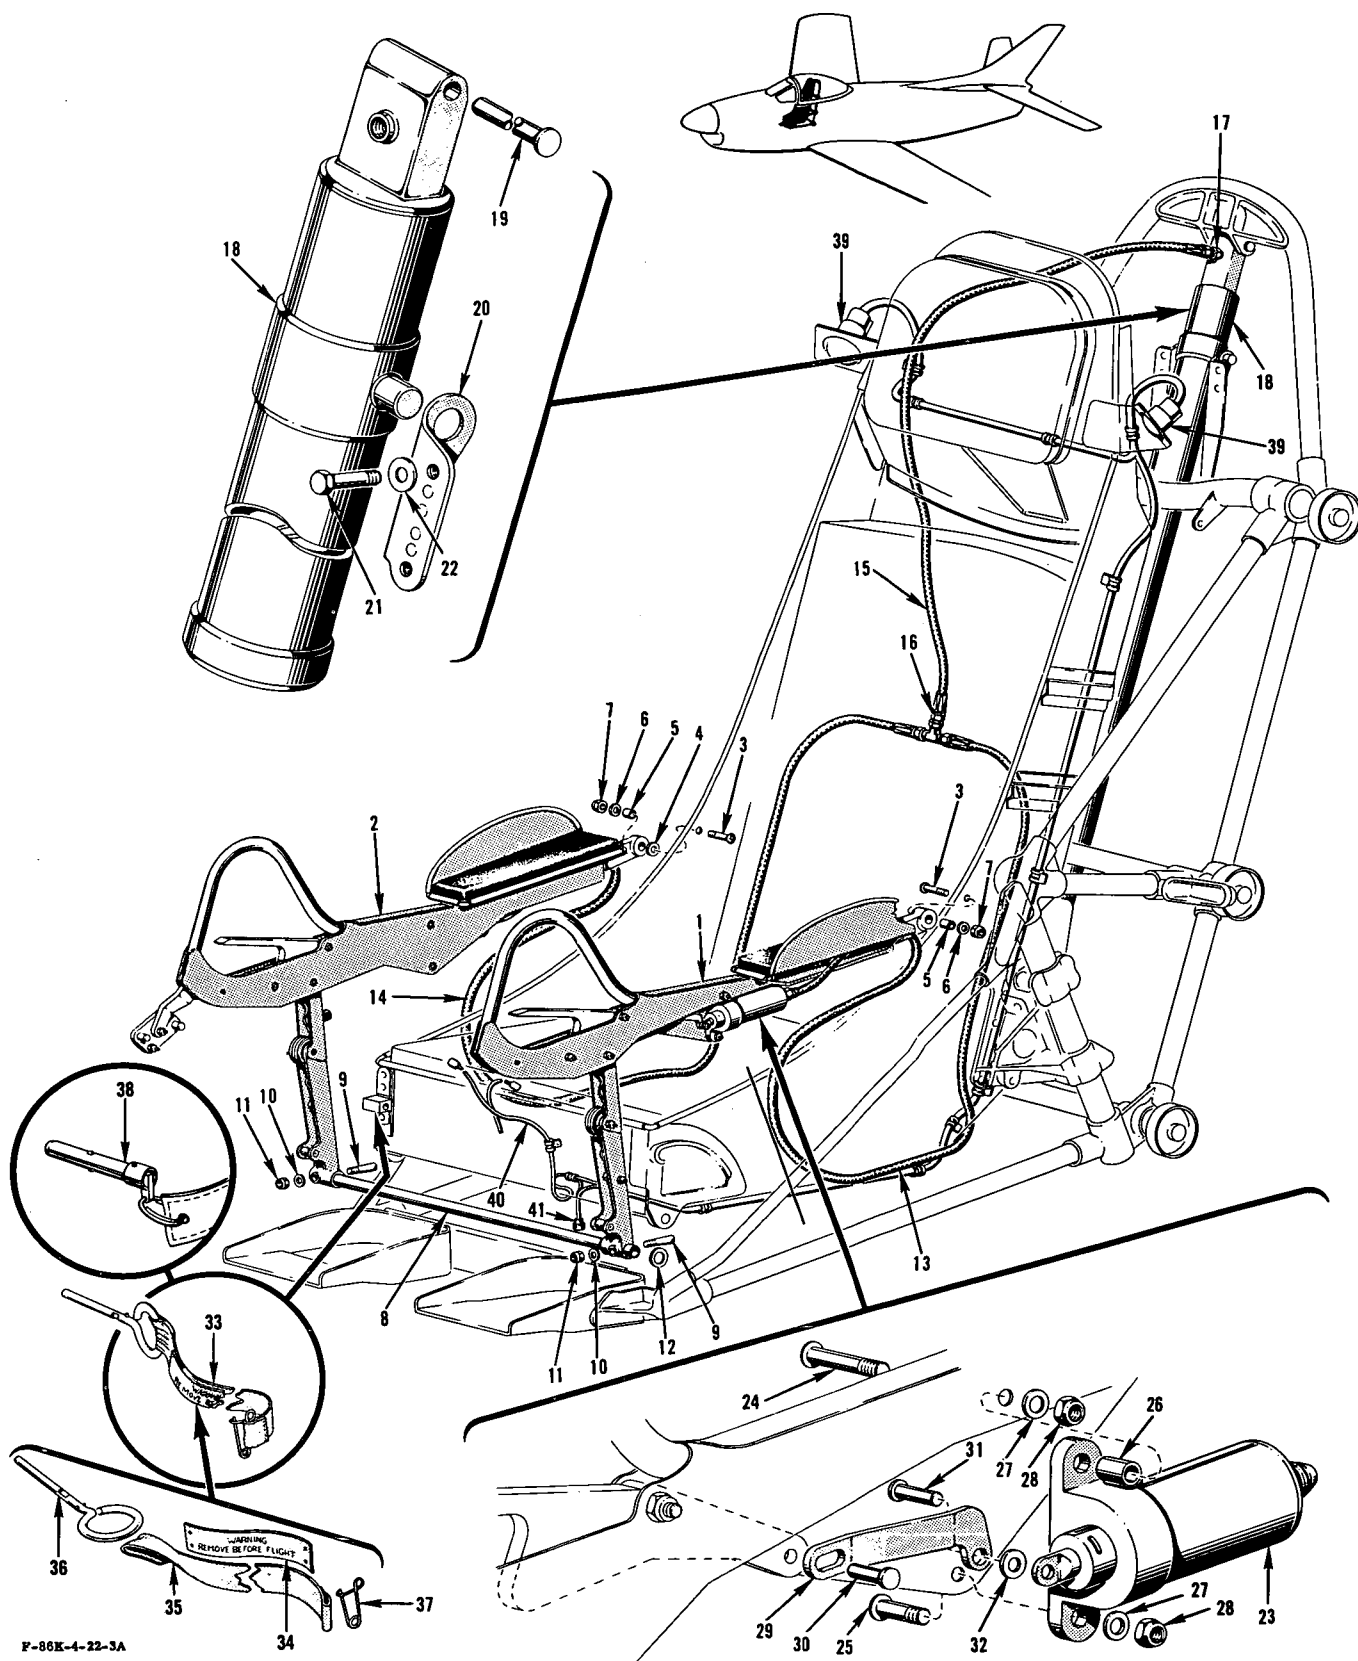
PILOT'S EJECTION SEAT GUN FIRING EQUIPMENT AND ELECTRICAL LIGHT INSTALLATION
